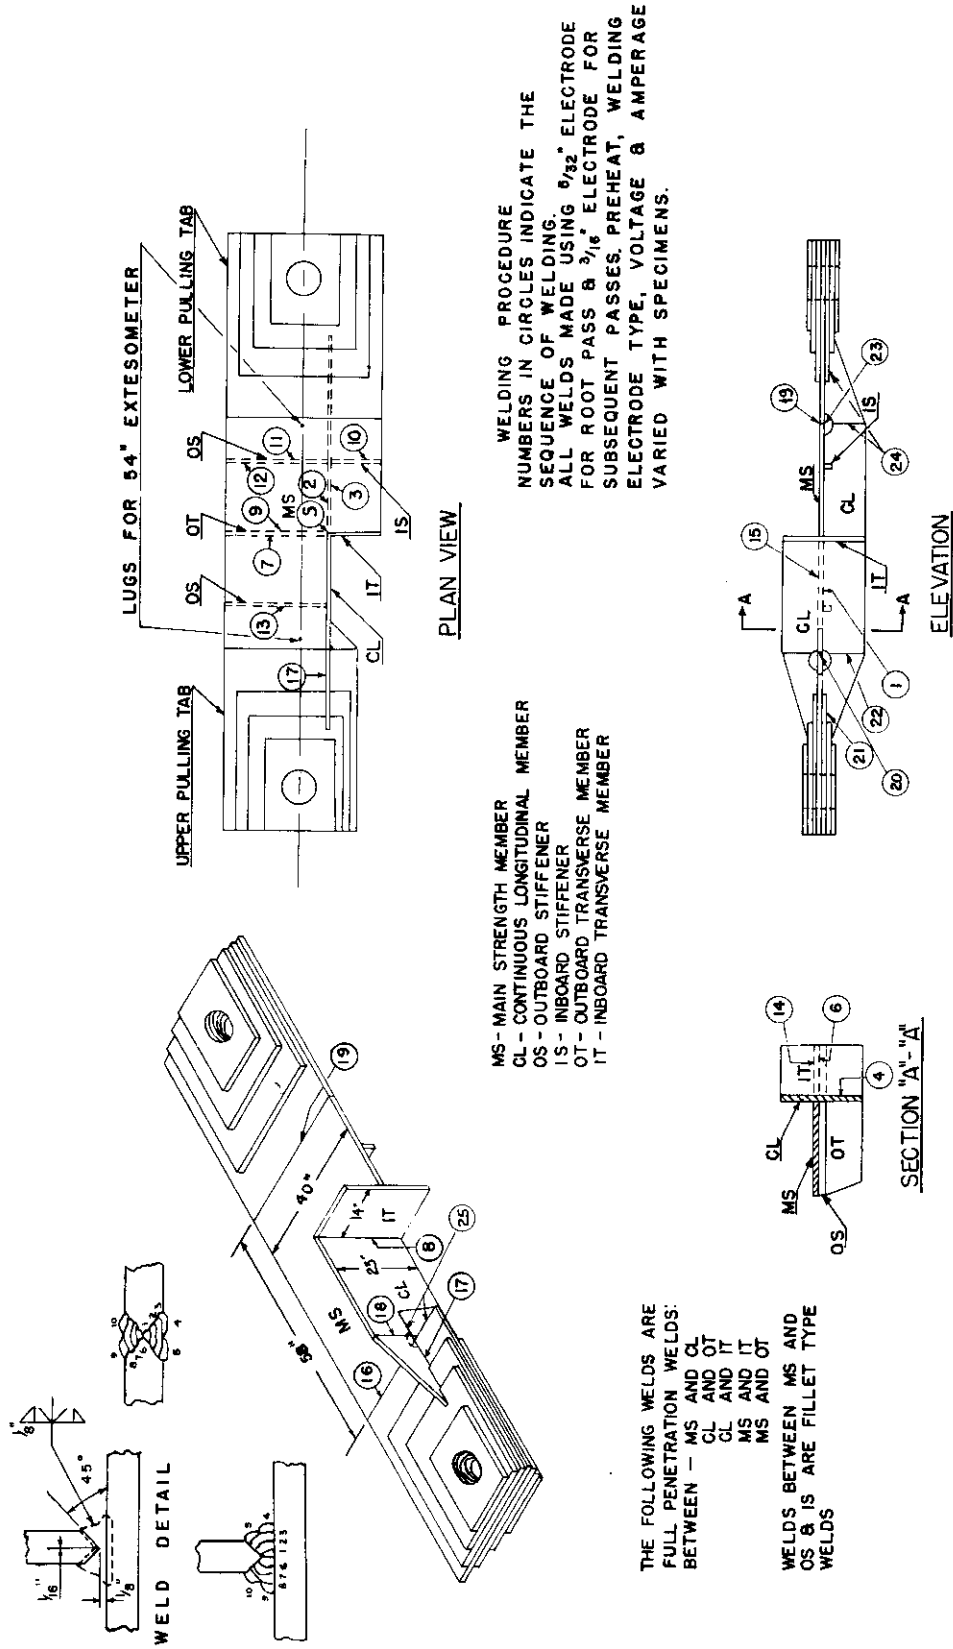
RESTRAINED WELDED SPECIMEN USED FOR TESTS OF HIGH TENSILE STRENGTH STEELS AND AUXILIARY TESTS ON MILD STEELS B_r & C
